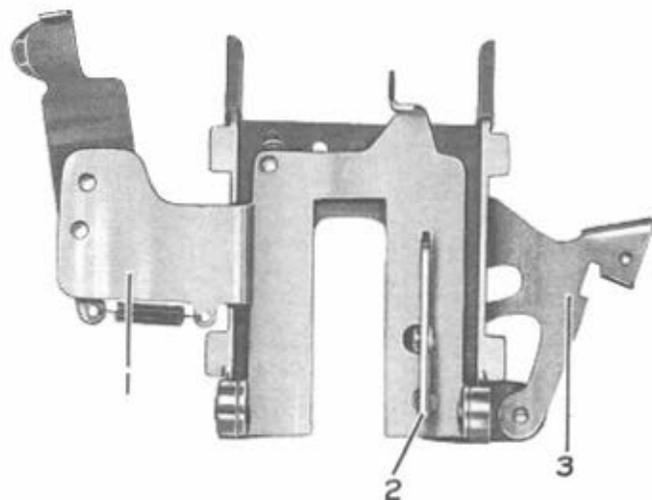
No. 11946-A Selector Slide and Cancel Plate Assembly (Front View)
